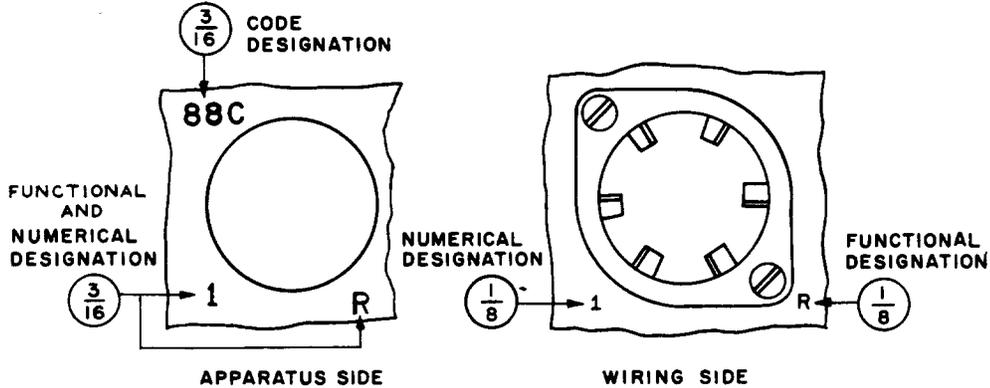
Resistors — 88 and Similar Types (Socket of Resistor Shown) — See Table C
